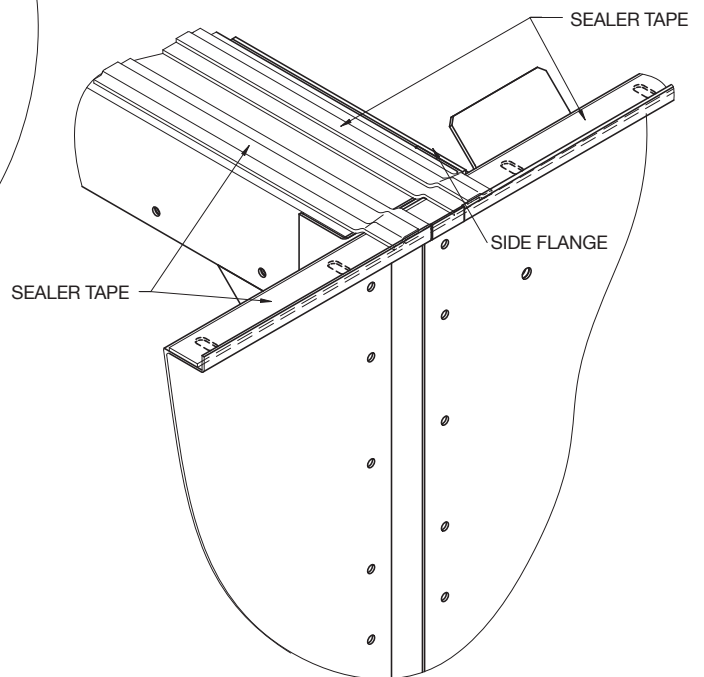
Sealer Detail for Center Joint of Units with two Coil Sections
